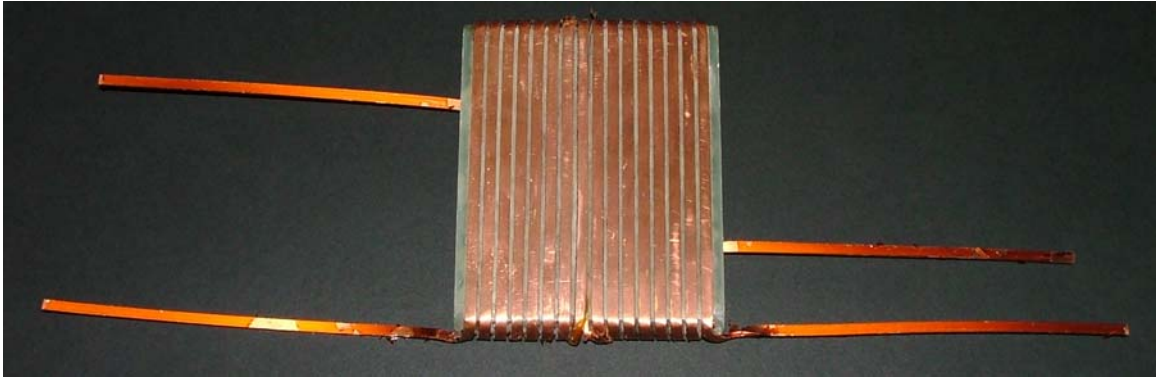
Two coils in parallel that can be used to have a lower inductance actuator for forming fuel cell plates.
